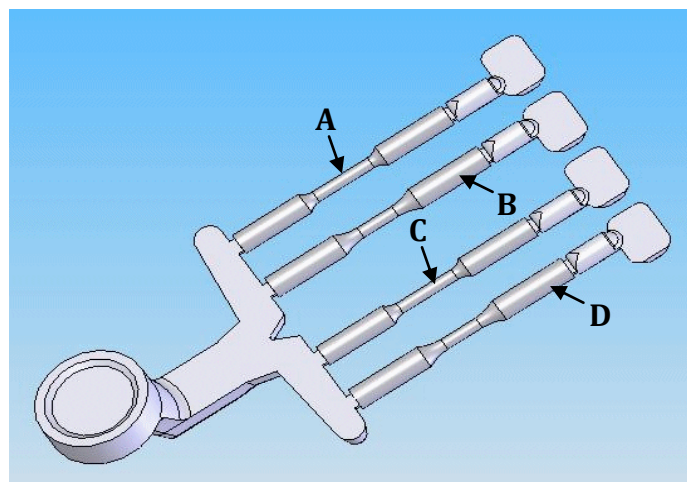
Schematic illustration of the die-cast component produced by the HPDC machine, showing the two tensile test specimen (labelled A and C) and the two fatigue test specimen (labelled B and D).
